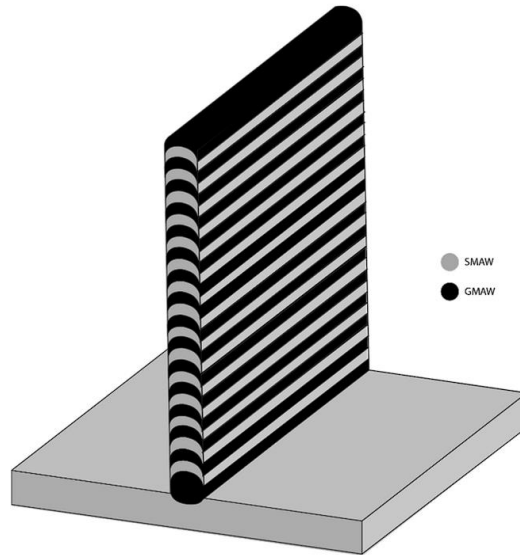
GMAW-SMAW Welding Layer Scheme with the WAAM Method
